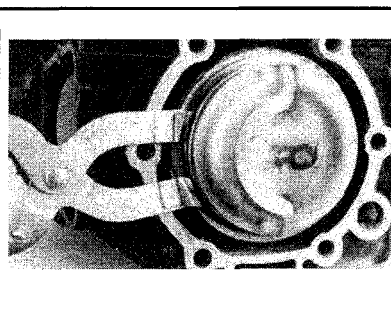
Use a universal ring expander to spread the rings JUST enough to slip over the piston
